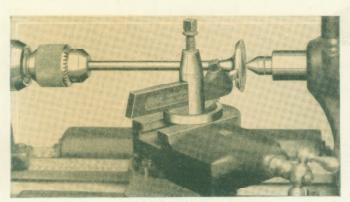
Refacing a Valve at 45° Angle by Turning, Using a 3-Jaw Drill Chuck to Hold Valve
